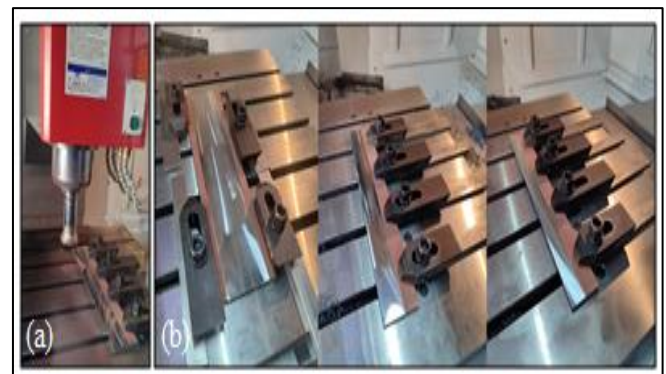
(a) Test Sample Surface Milling Process, (b) Connecting the Test Samples to the Milling Table According to the Radial Immersion
